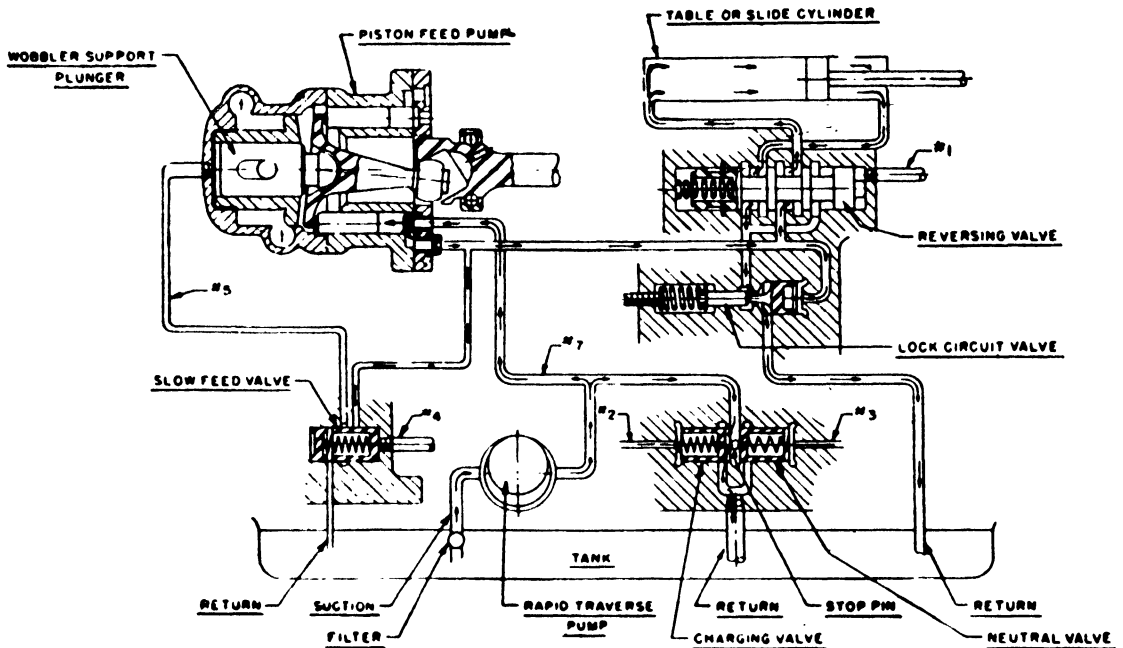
The Sundstrand Machine Tool feed circuit. (The Sundstrand Machine Tool Co., Rockford, Ill.)
